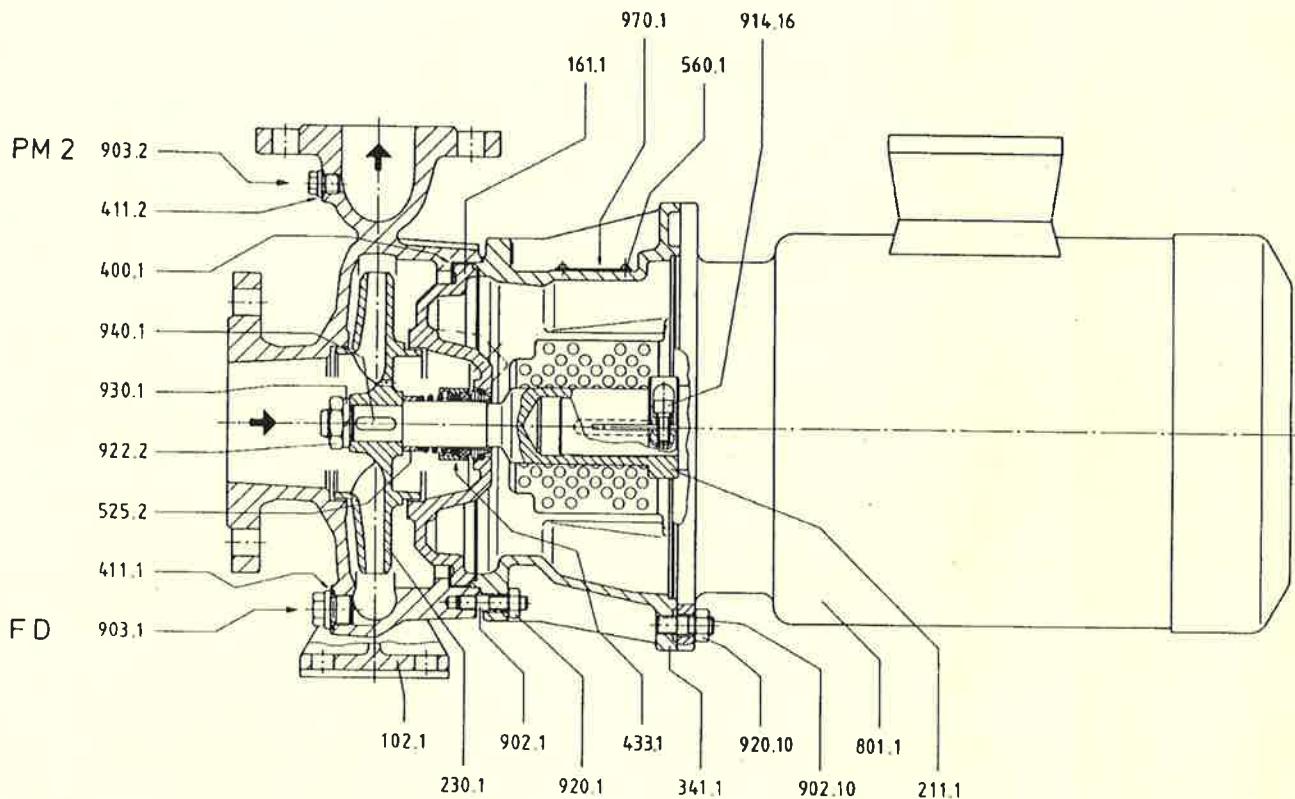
U3...D – Unbalanced mechanical seal – sizes with diameter 30 at the shaft seal
